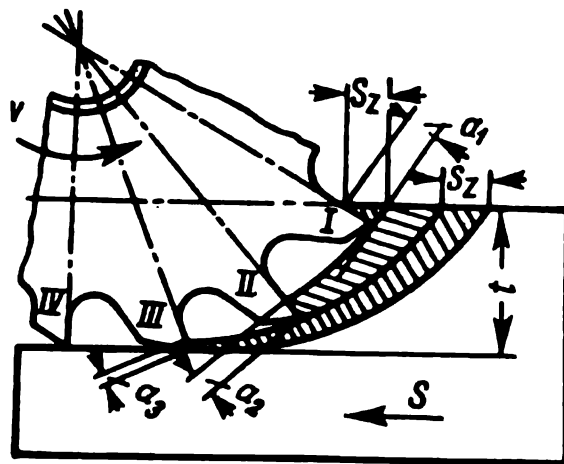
Feed in milling and the thickness of the chip cut by the cutter teeth
